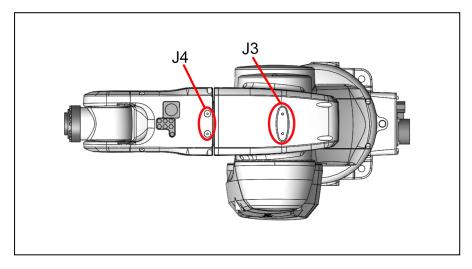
External Equipment Mounting Locations for J3 and J4
